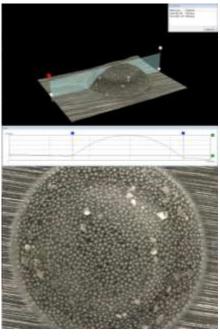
Analysis of a solder paste depot achieved by jetting using a standard Piezo driven valve
